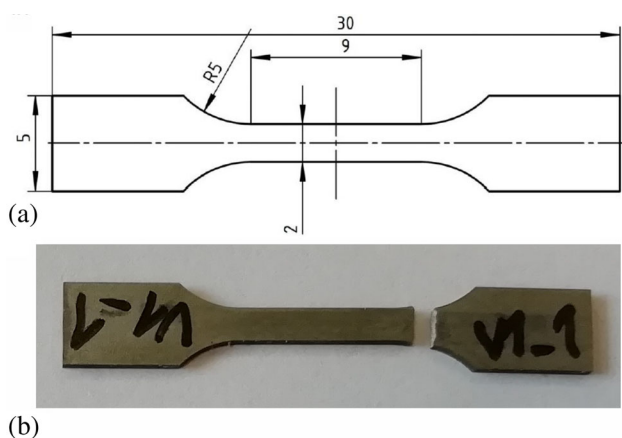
Dimensions and geometry of the MFT samples according to DIN EN ISO 6892-1 with 1 mm thickness (a), and macro-view of the Inconel® 625 sample after testing (b)
